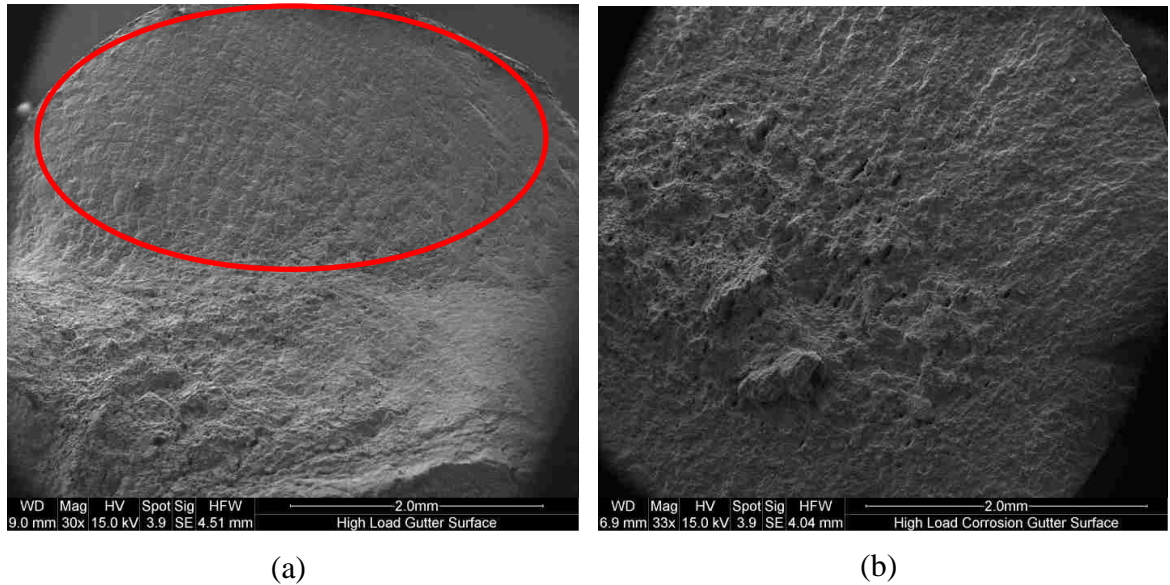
Fracture surfaces of high-load Gutter fatigue specimens (a) as-extracted and (b) pre-corroded
